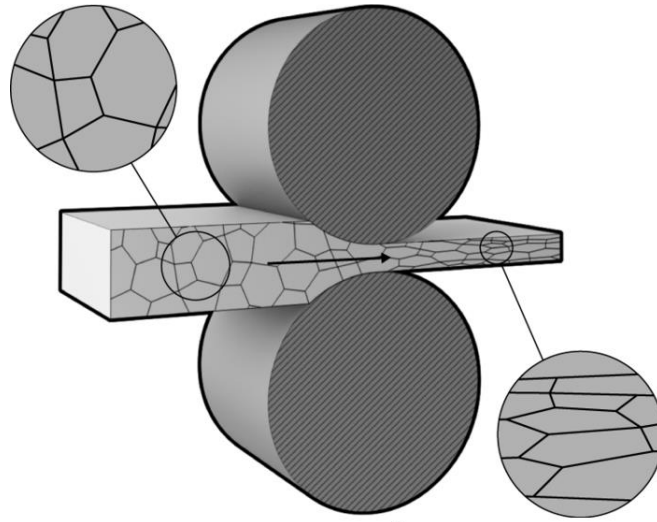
Cold rolling of a metal sheet. (Wearing, 2018).
